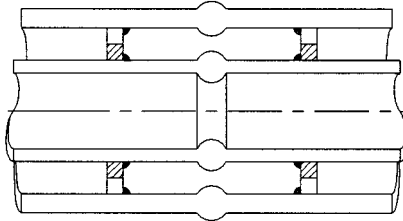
Remove the heater plate and bring the pipes together using the specified final weld pressure.
